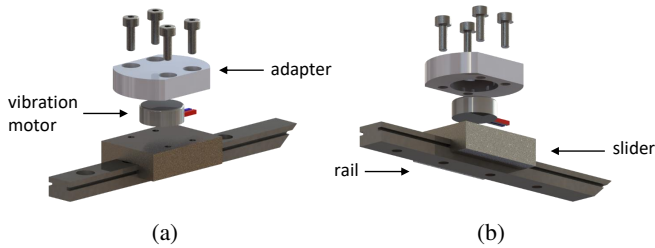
Sliding mechanism with adapter and vibration motor; (a) top view isometric, (b) bottom view isometric.
